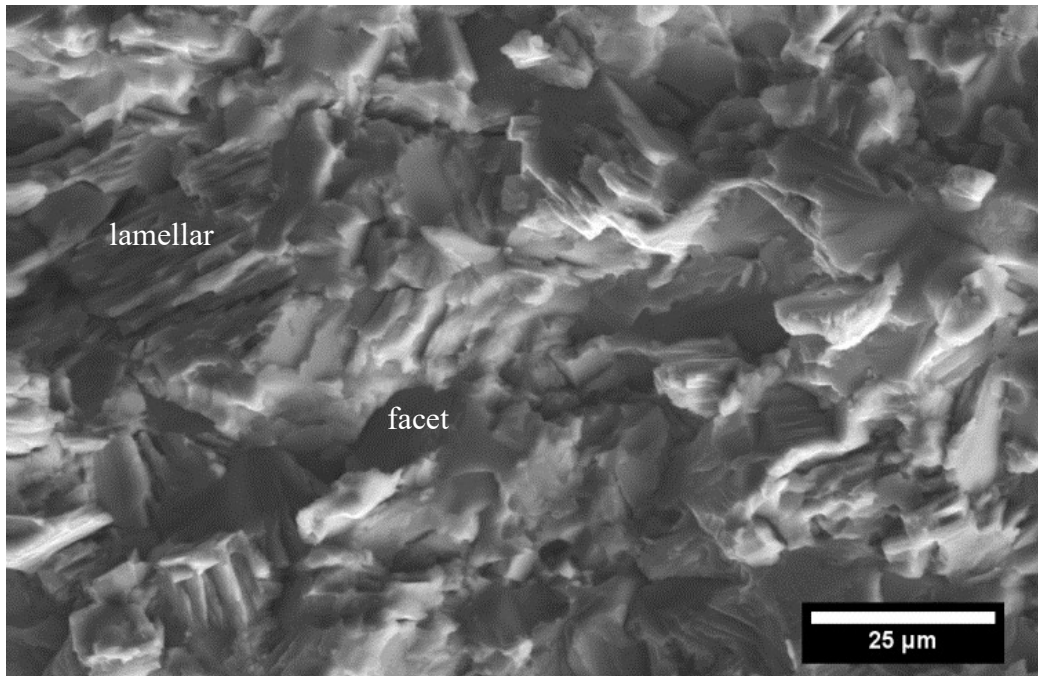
SEM-SE fractography of Sidepress-forged fatigue fracture features in the high  $\Delta K$  regime at  $R = 0.7$ . Crack direction is from top to bottom.
